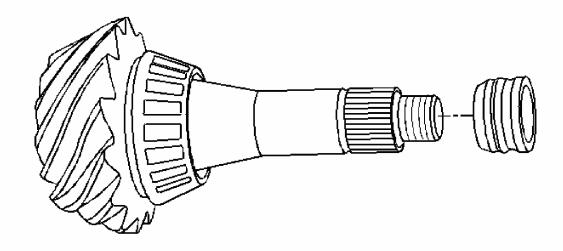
View Of Collapsible Spacer & Pinion Courtesy of GENERAL MOTORS CORP.
